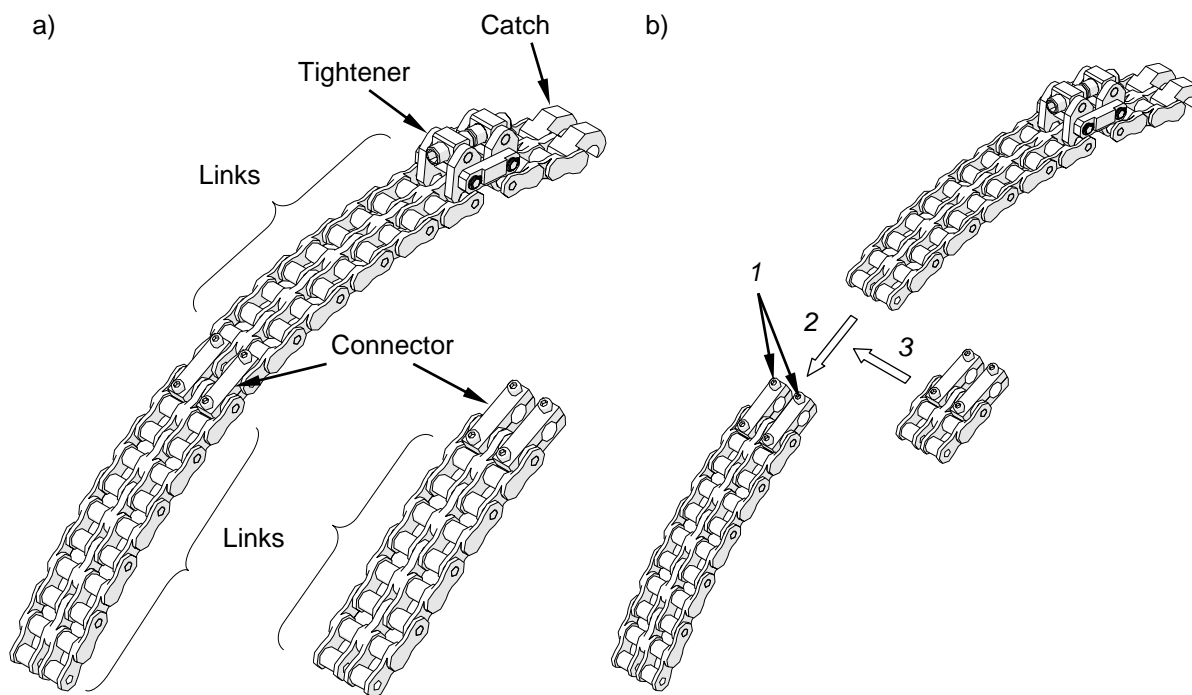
View of the basic and the 9-link segment (a); assembling the chain for a pipe with the outer diameter of 223–251 mm (b)
